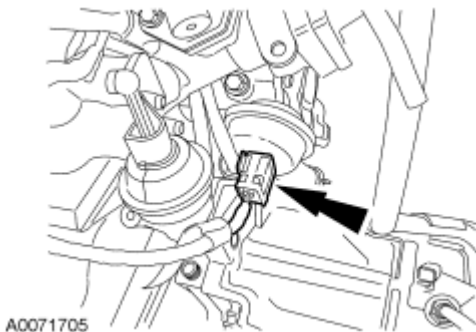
Locating Intake Manifold Runner Control Actuator Electrical Connector
